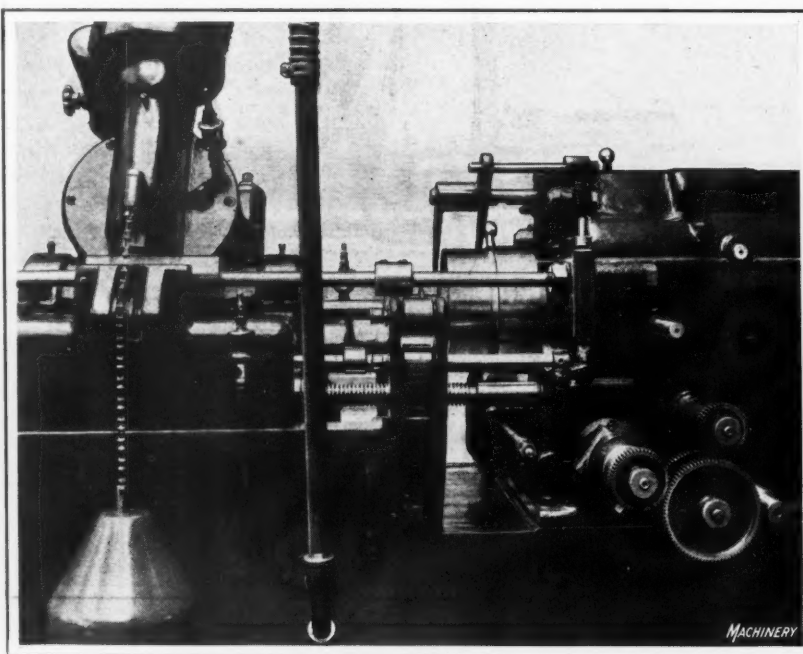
Rear View of Thread Generator, showing the Driving and Tripping Mechanisms
